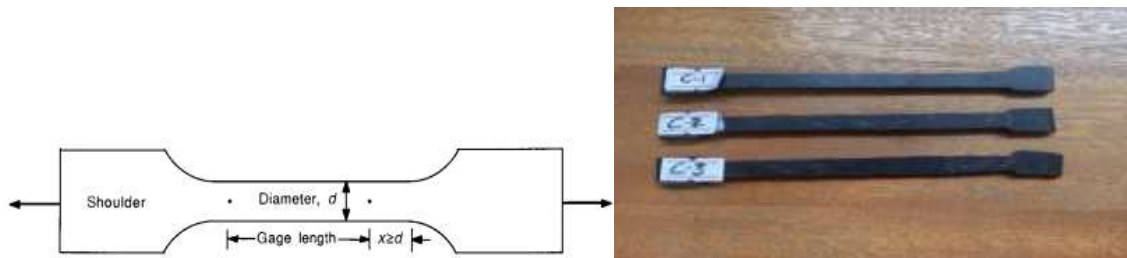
Typical tensile specimen, showing a reduced gage section and enlarged shoulders
